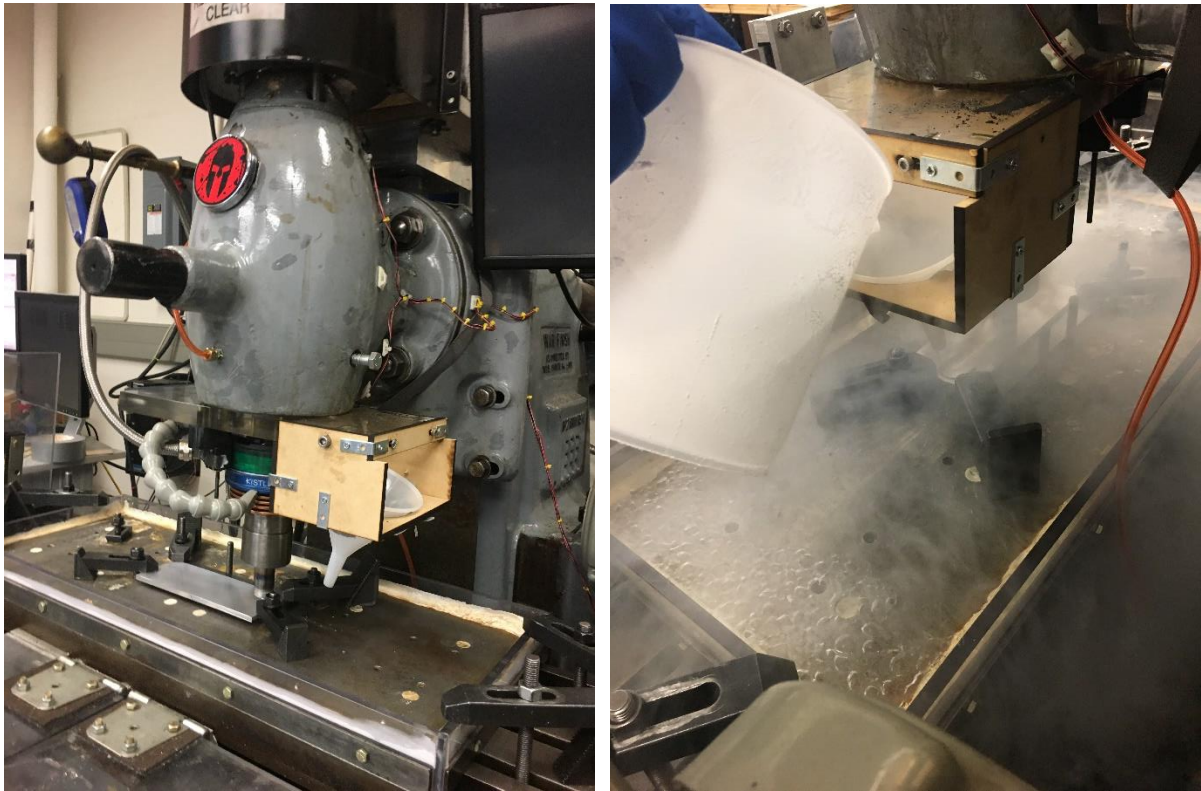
(Left) The setup for the LN welds which shows the MDF holder and funnel mounted to an acrylic plate above the spindle. (Right) LN in-process cooling, dispensed using a plastic beaker.
